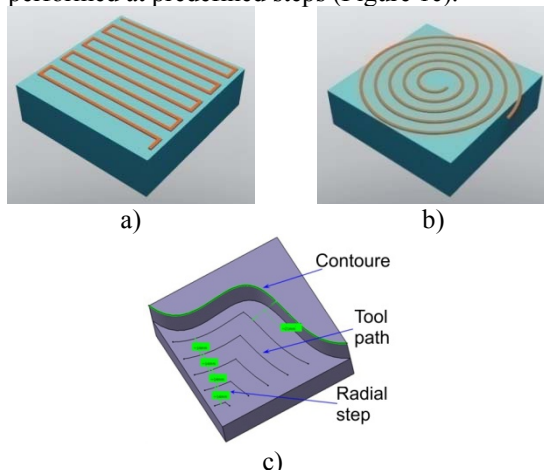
Examples of roughing strategies; a) Raster milling [2], b) Spiral milling [2], c) Profile milling [9]
